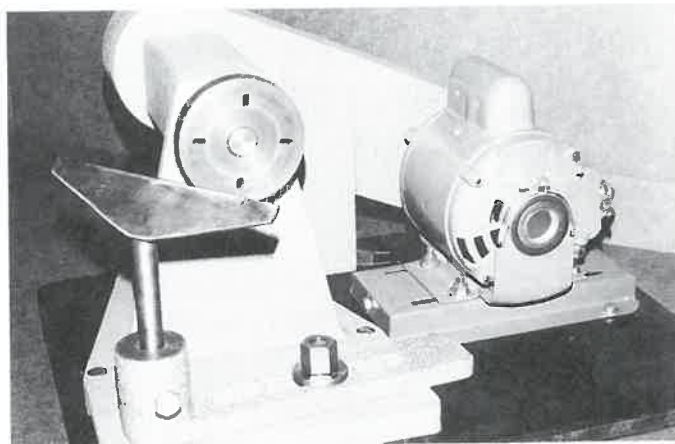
The bowl lathe is for faceplate turning only. (Brodhead-Garrett)
